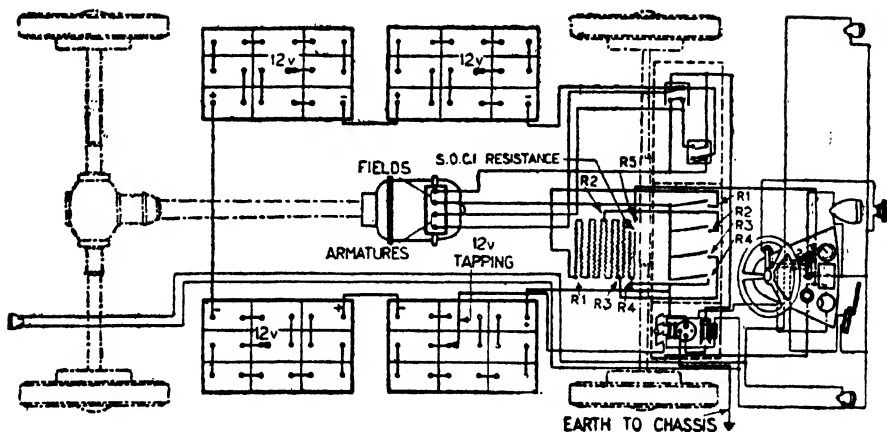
OUTLINE DESIGN OF CHASSIS OF STANDARD ONE-TON BATTERY-ELECTRIC DELIVERY VEHICLE SHOWING THE WIRING CONNECTIONS
